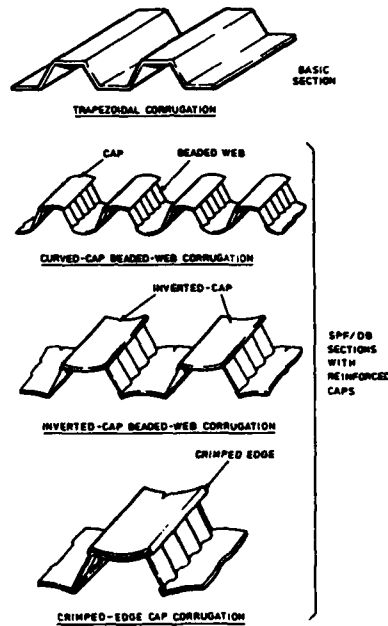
Corrugated sheet structures made by SPF and SPF/DB [7]
